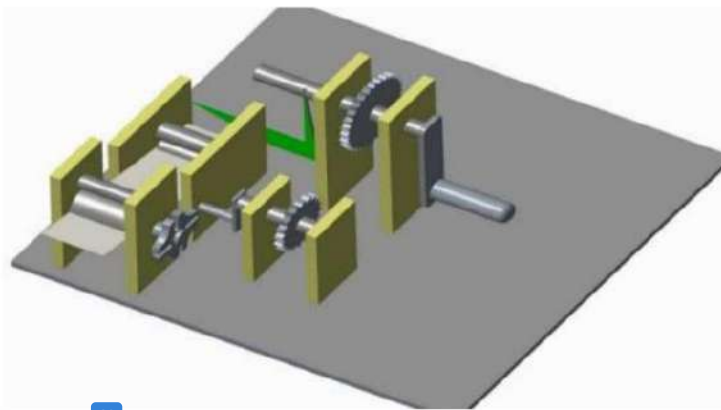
Automatic Paper Cutting Machine by using Geneva mechanism [13].
